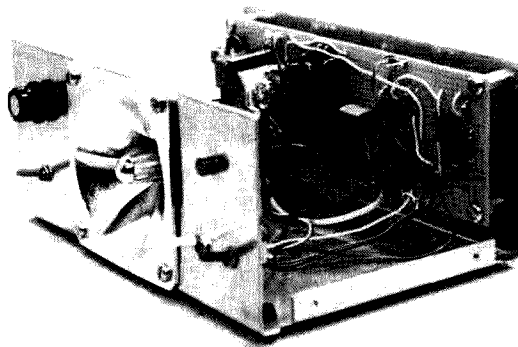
A hybrid cabinet using a chassis base with wood end pieces.
